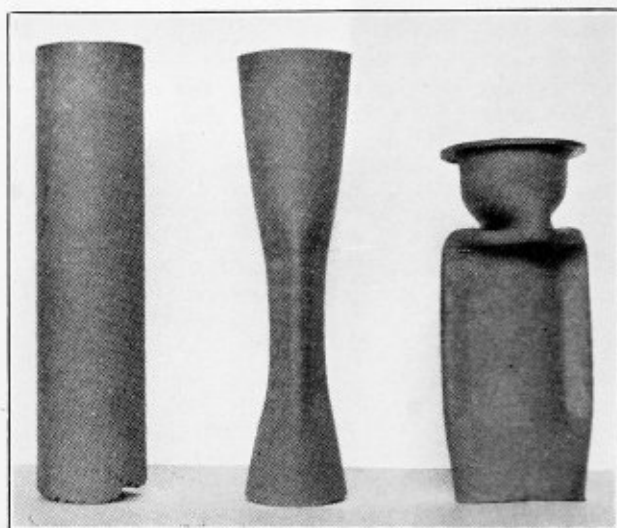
Special Test Applied to Spellerized Steel Locomotive Boiler Tubes. Combined Vertical Crushing, Horizontal Flattening and Flange Tests on One Piece
